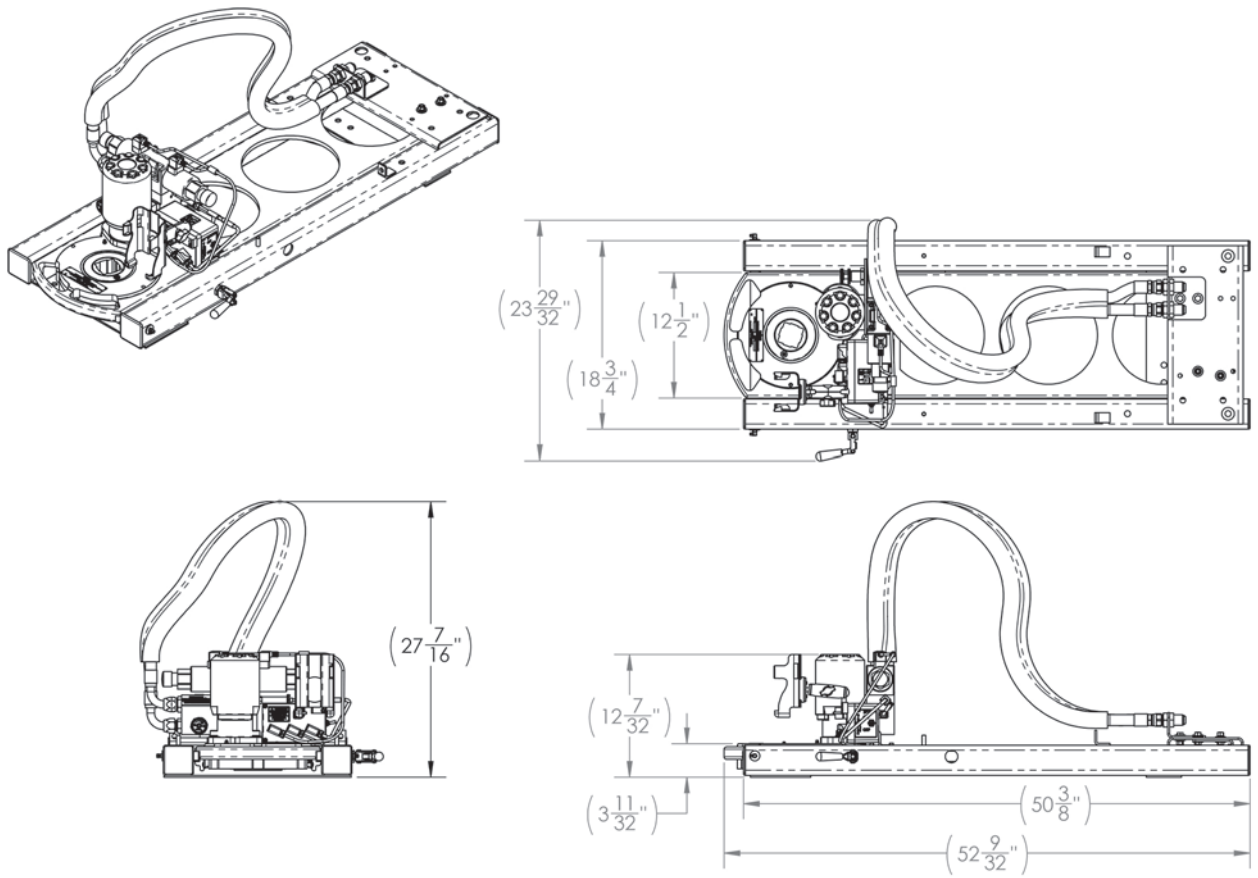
Overall dimensions for TM-7 configuration 17-000-27.
